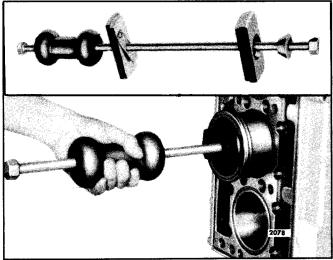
Removing Cylinder Liner with Tool J 22490
